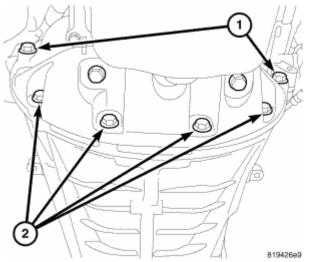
Structural Cover Mounting Bolts 3.8L Courtesy of CHRYSLER LLC
